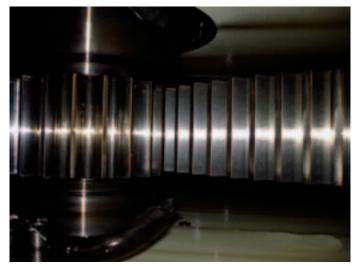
12K98ME, gearbox for engine driven hydraulic pumps, excellent condition of gears after 10,762 hours
